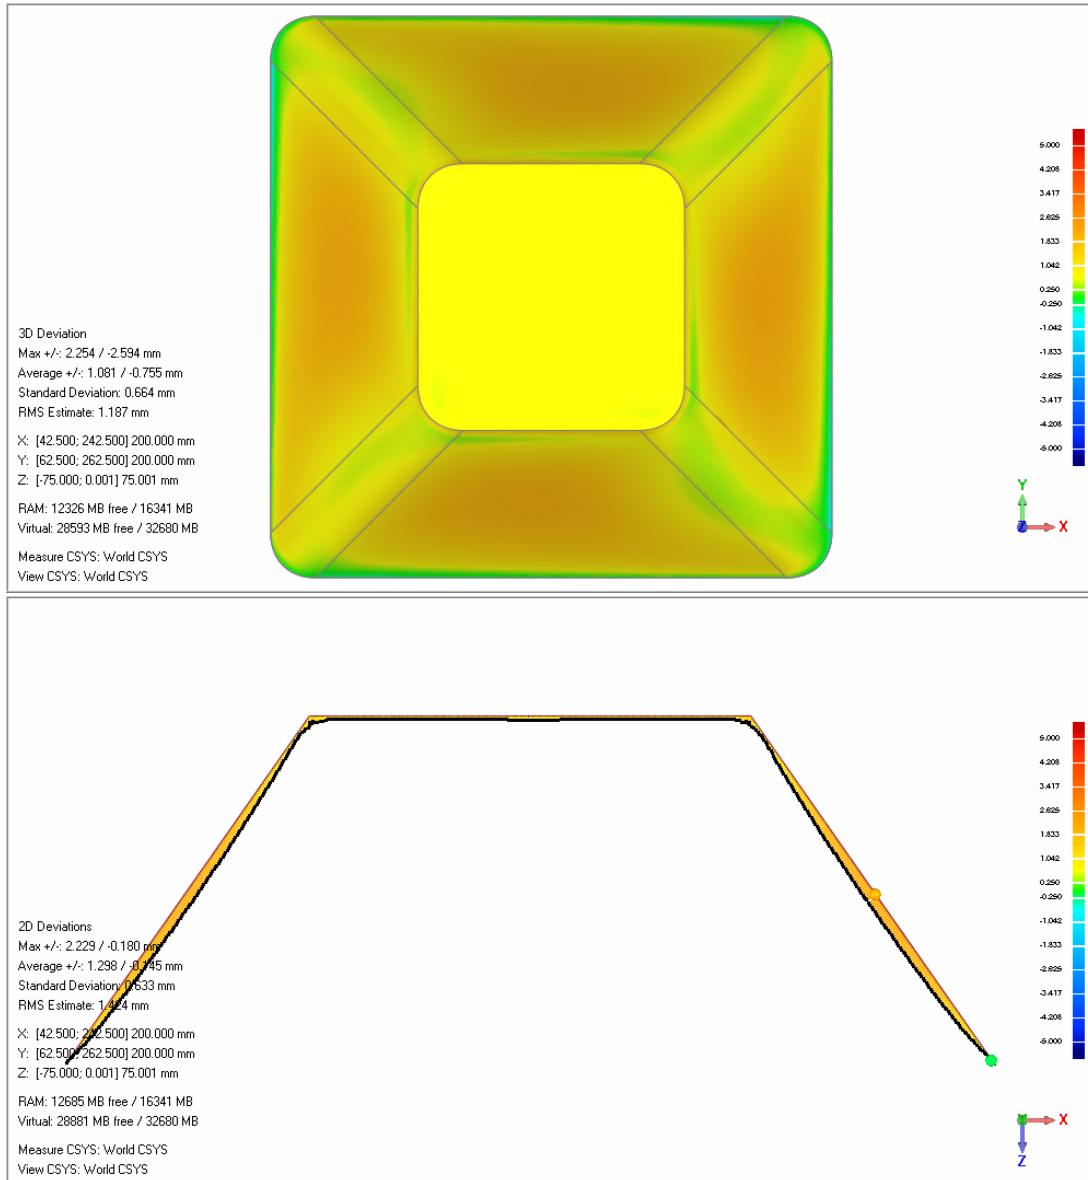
Part T9A geometric accuracy results - top view and cross-section view
